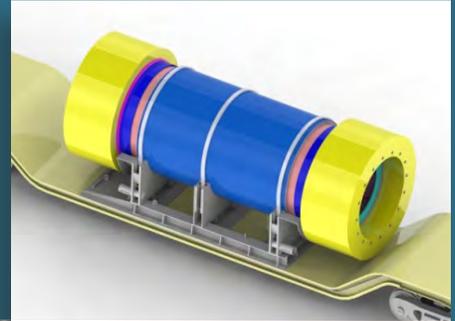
Overpack and Canister Movement to ISFSI Pad Using Transporter
